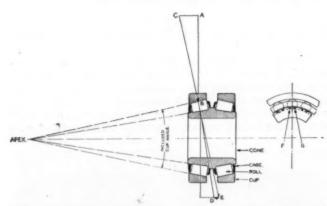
Diagram Showing the Theory and Design of Tapered Roller Bearings
